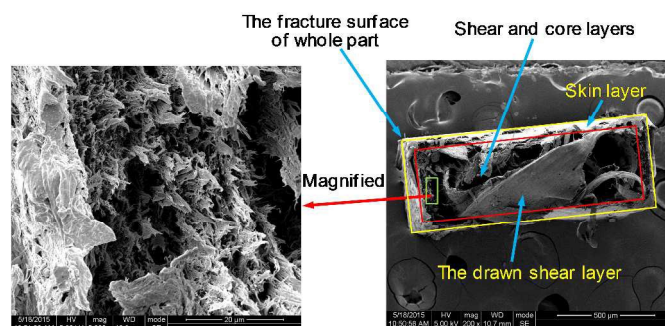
SEM photos of the fracture surface of microinjection molded dumbbell-shaped micropart after tensile test
